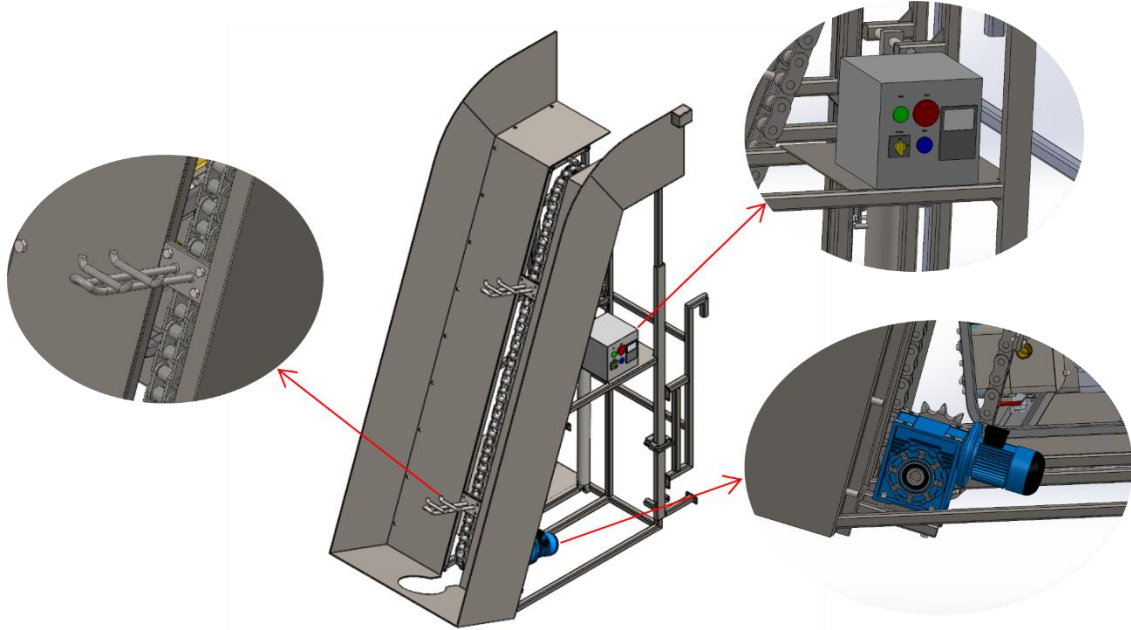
Full Assembly of Palm Fruit Lifting Device
